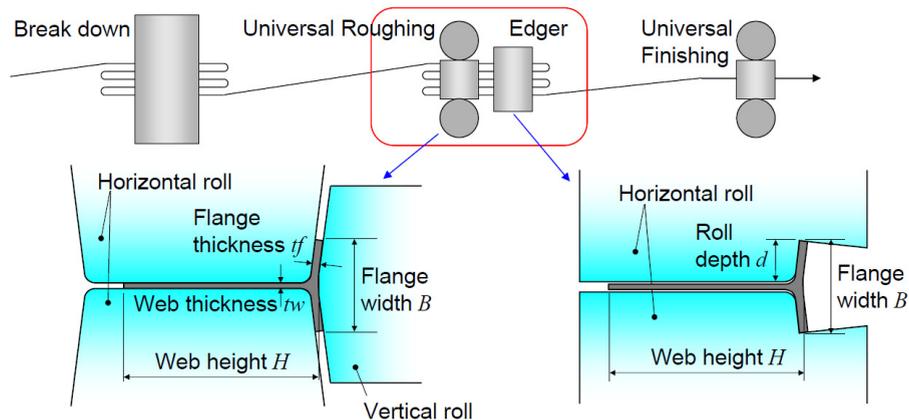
Mill layout of T-bar rolling and schematic diagrams of Universal Roughing and Edger rolling.
